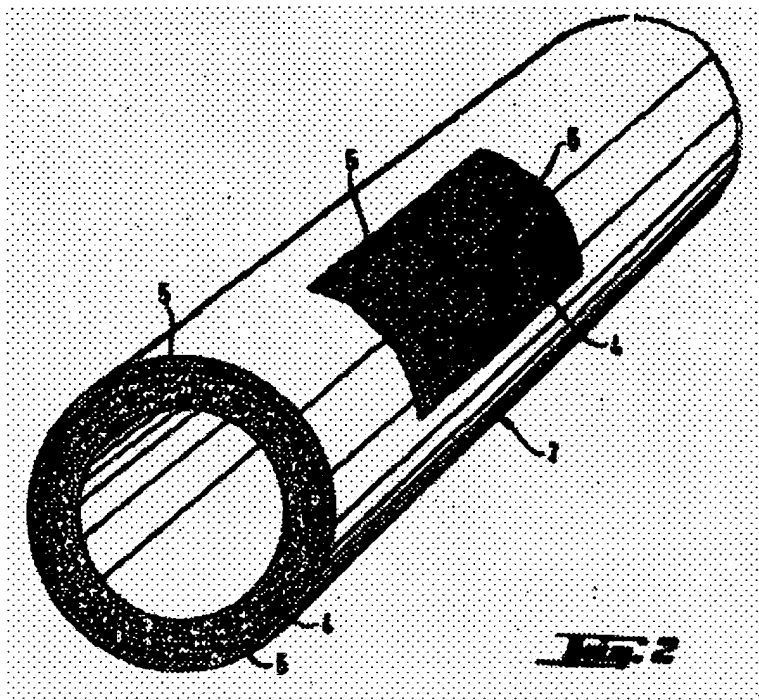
shows a roller 1 with a hollow cylindrical roller body 2 and a bearing journal 3, which is connected to the roller body 2 with a non-positive or positive fit in an arbitrary way. In Figure 2, the roller body 2 comprises a hollow cylinder made from carbon fiber-reinforced carbon 4, which is provided with a layer made from a resistive metal 5.
